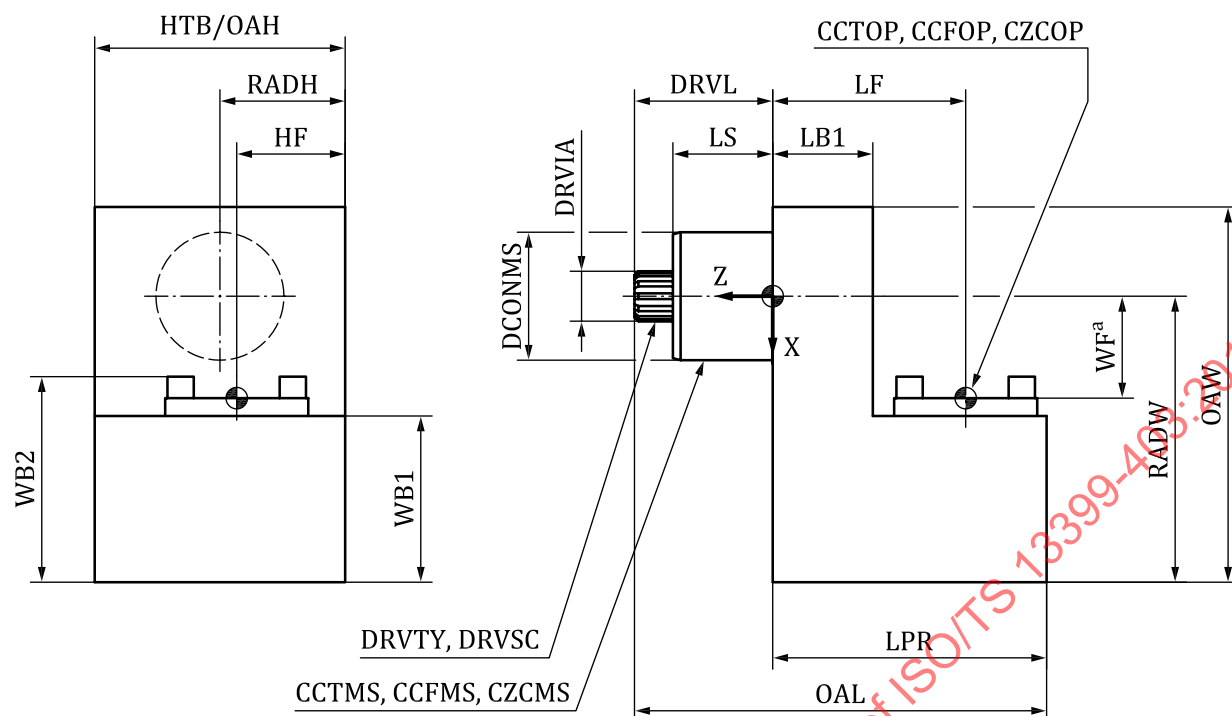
Assembled driven tool unit with 90° output design and torque bracing
